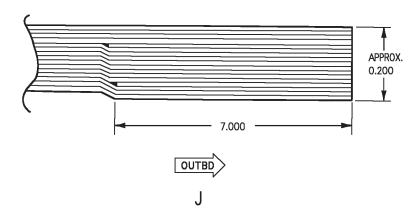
Outer Wing Upper Surface Inspection Areas (Sheet 4)
